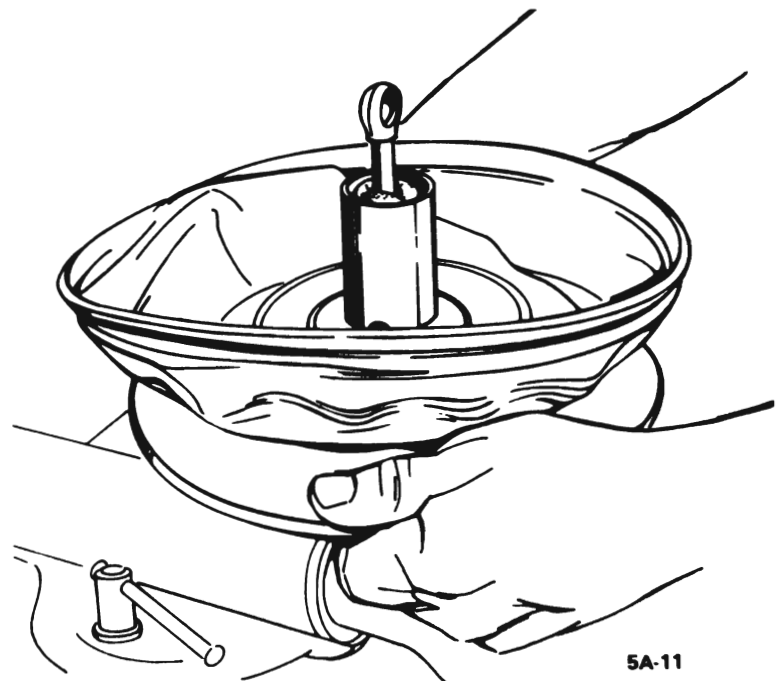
A-11 Locking or Unlocking Primary Support Plate From Primary Power Piston
